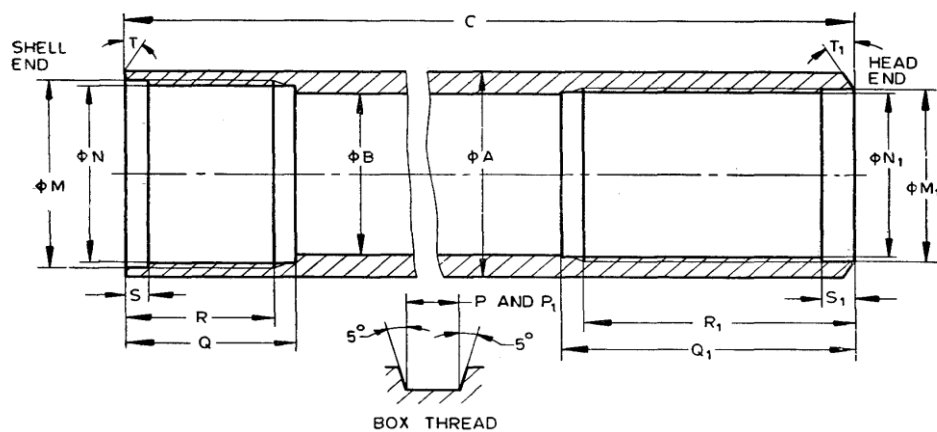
'WT' DESIGN DOUBLE CORE BARREL — OUTER TUBE
